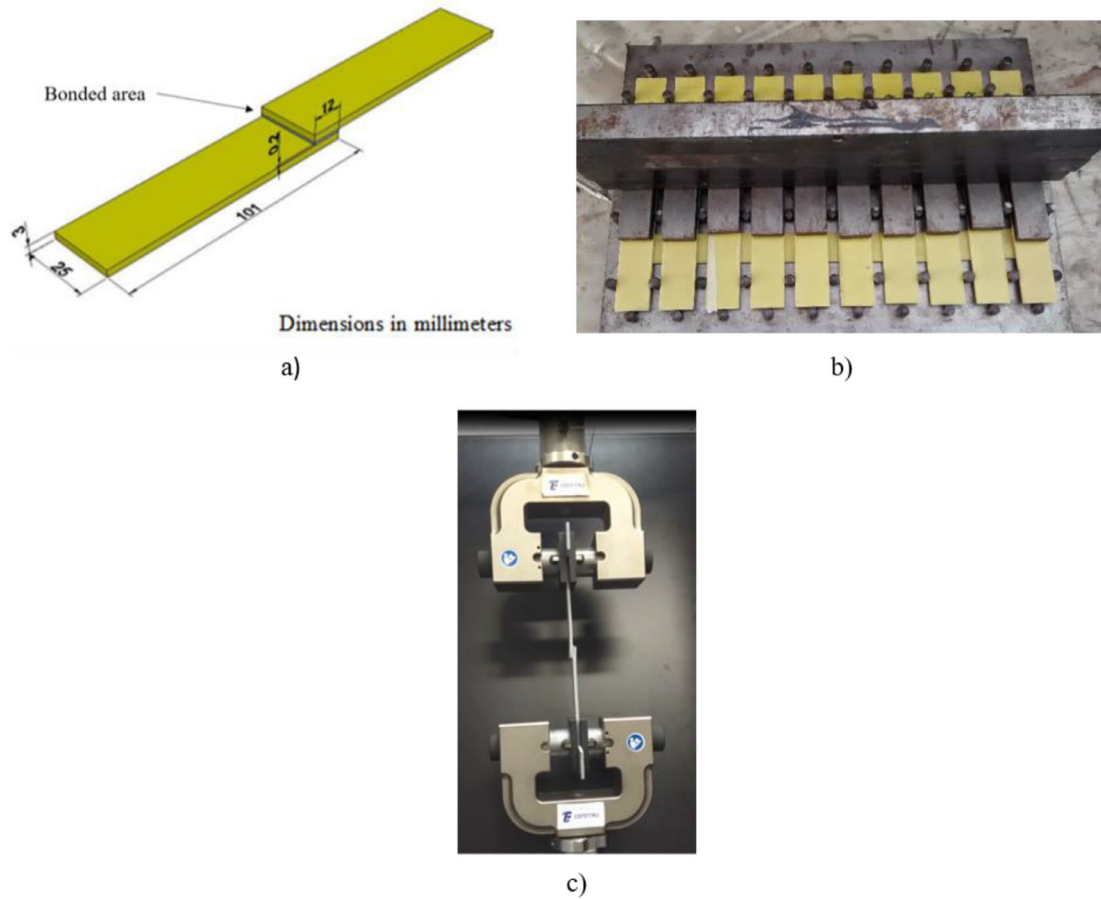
SLJ (a) geometry (dimensions in millimeters). (b) bonding process and (c) test set up.
